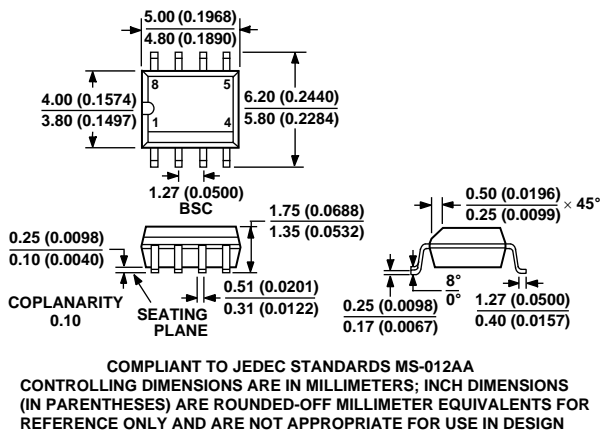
8-Lead Standard Small Outline Package [SOIC] (R-8)
